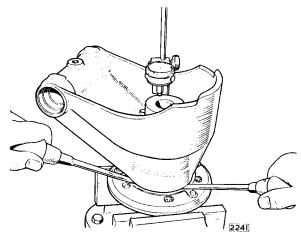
Checking the hub bearing end-float with a dial test indicator (Churchill Tool No. J.13).
